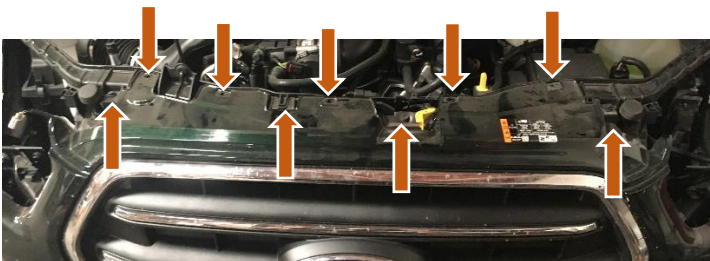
Plastic Rivets (Top) and Bolts (Bottom) to be Removed
